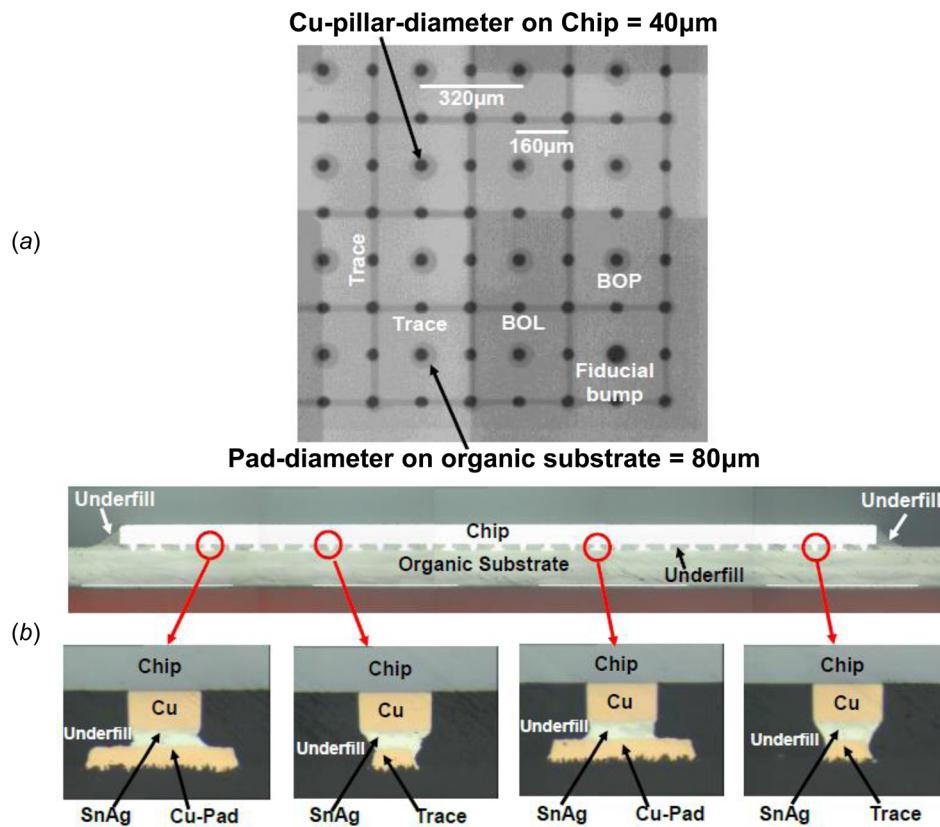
(a) X-ray image and (b) a typical cross section of stencil printed underfill for flip chip on organic-panel assembly
